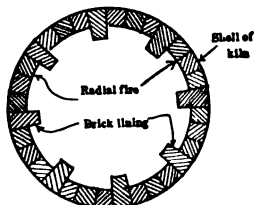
An end cross section of a rotary kiln, showing lining shapes.
